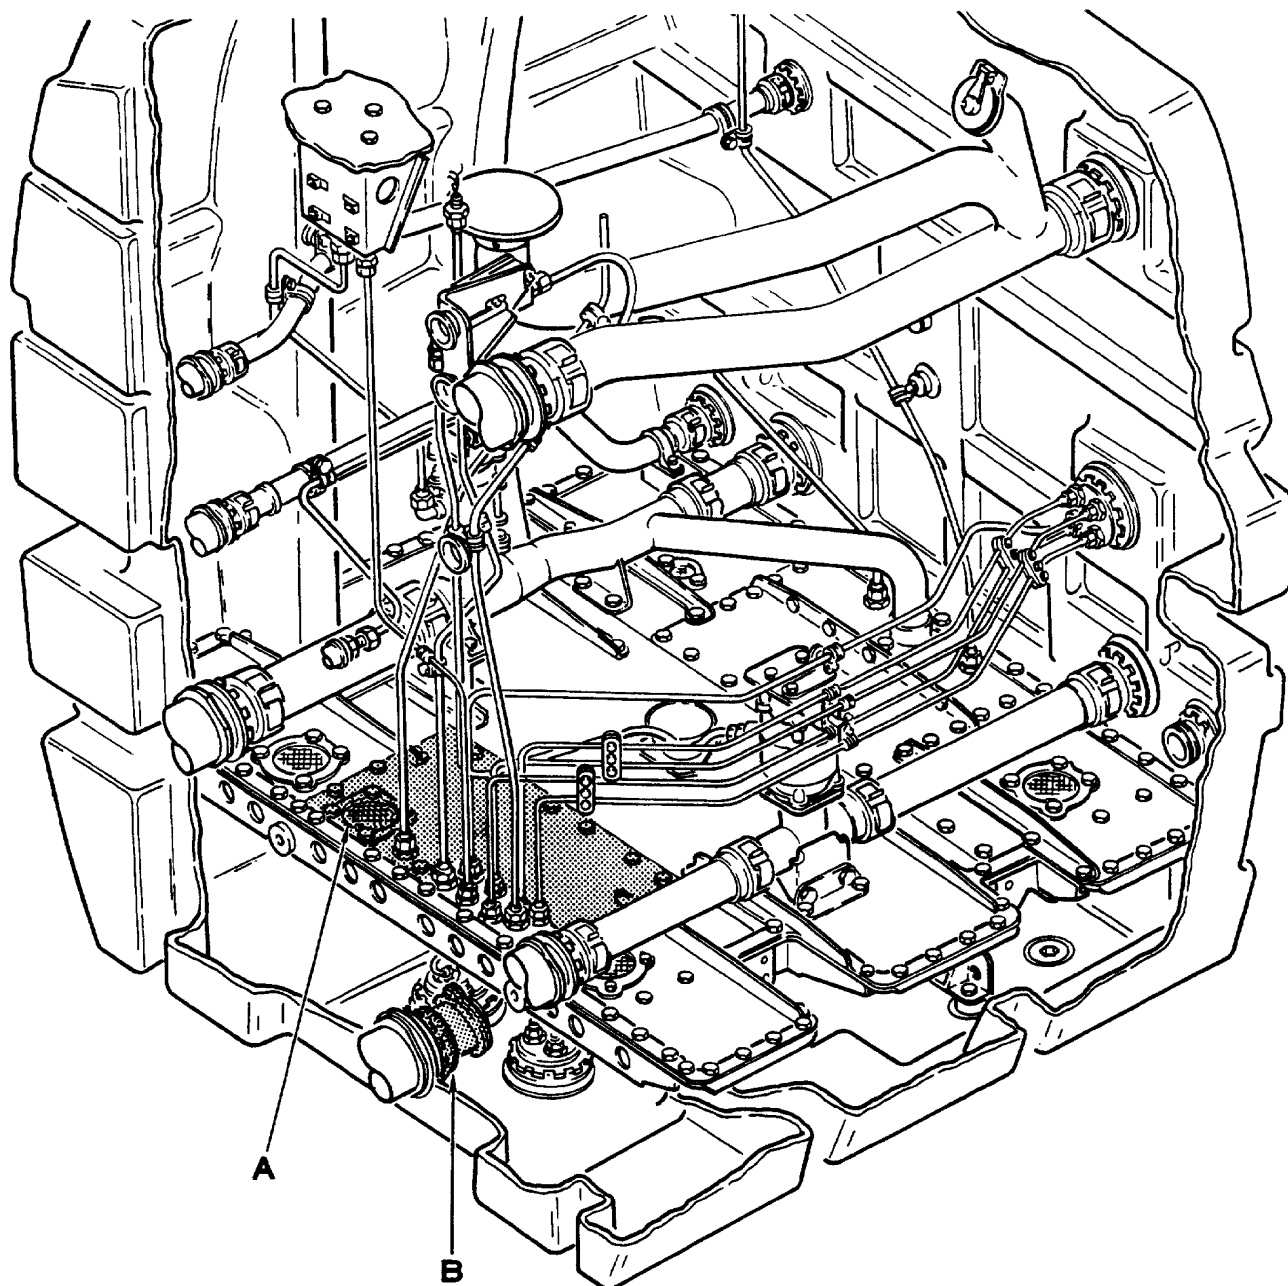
No. 2 Fuel Tank Gravity Feed Check Valve (5VAP600) (Sheet 1)
